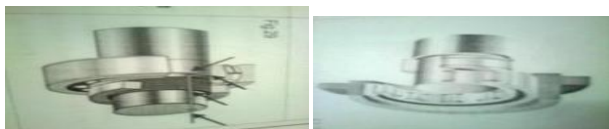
Assembly of taper roller bearing on shaft sleeve With lock nut
